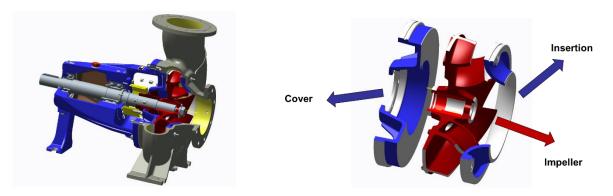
Overall view of centrifugal pumps (left); exploded view with main hydraulic components (right)
